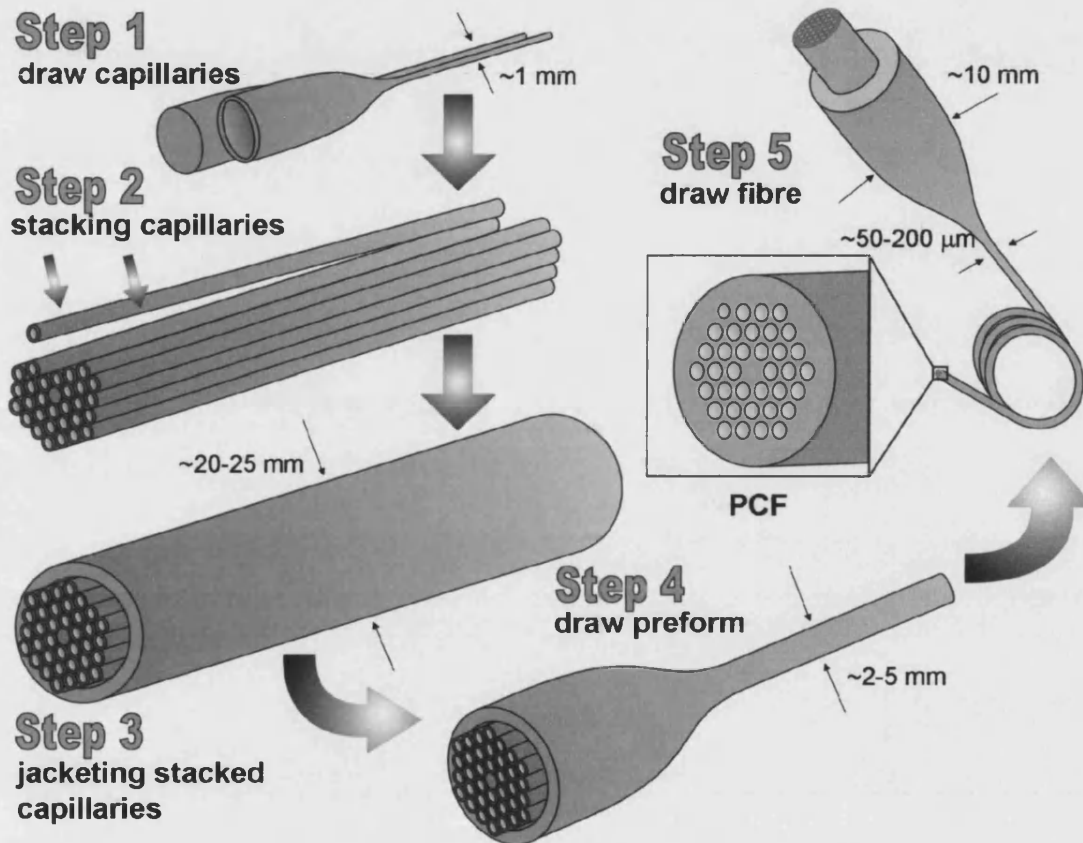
Schematic drawing of the PCF fabrication process by the stacking and draw technique.
